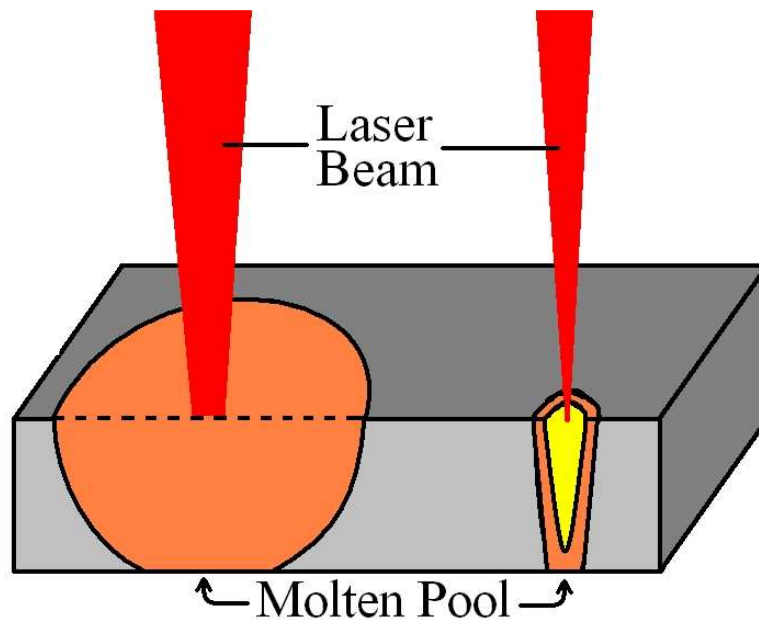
Schematic of weld pools formed from laser welding in a) conduction and b) keyhole [20].
